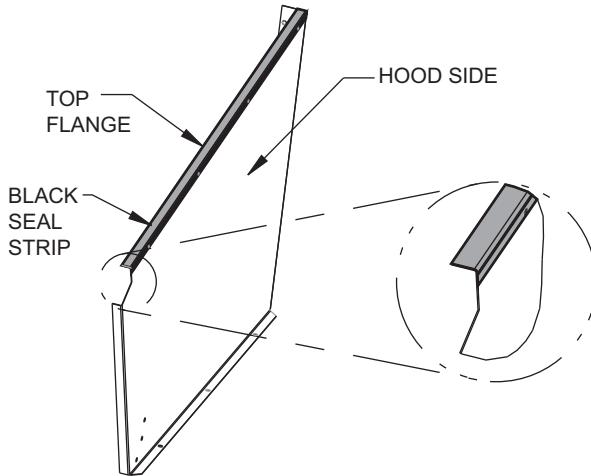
Adding Seal Strip to Top of Hood Sides
